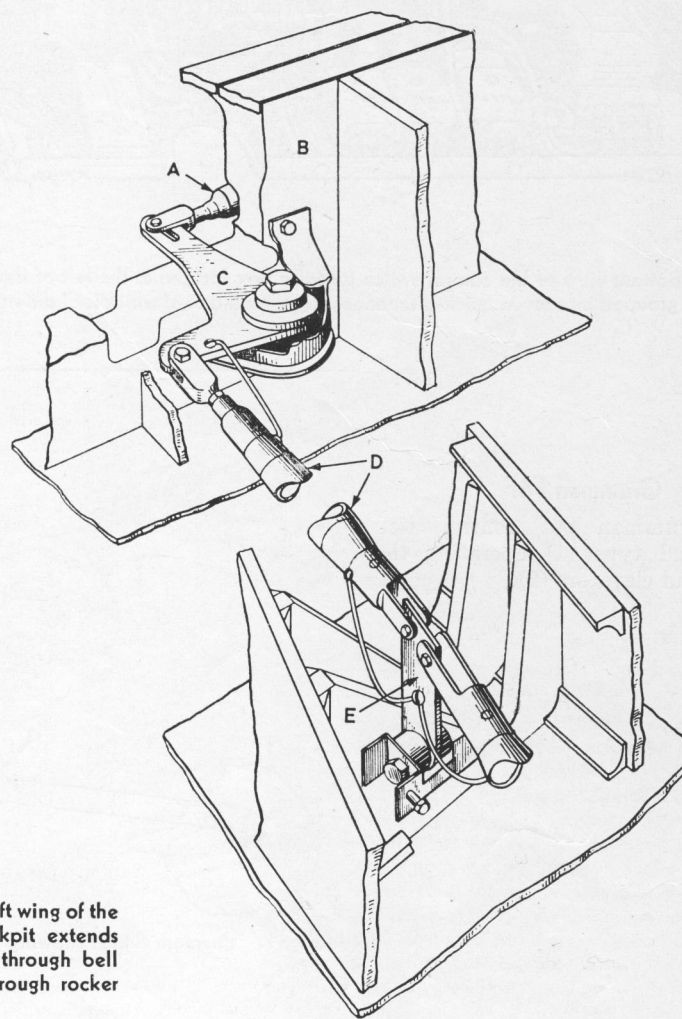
Changeover and rocker lever for the aileron in the left wing of the Messerschmitt Me-163. Push-pull rod (A) from the cockpit extends out into the wing ahead of the front spar (B), operating through bell crank (C) to a fore-and-aft push-pull rod (D), which goes through rocker lever (E).
